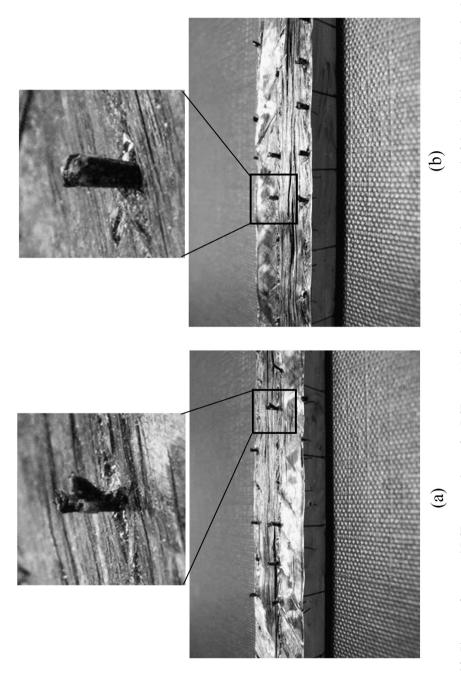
Pictures of separated DCB test specimen after DCB test. (a) Survived threads were broken at the end of the thread loop. (b) Survived threads were broken at the root of the lower stitch thread.
